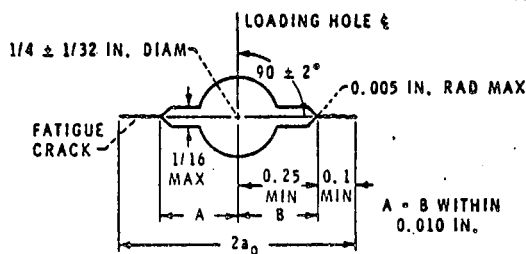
Fatigue crack starter for center-cracked plate specimens.
